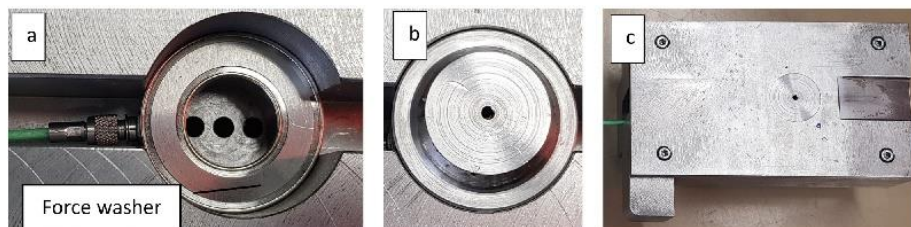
Quantitative measurement assembly (a) Force washer (b) Protection Plate (c) Fully assembled quantitative breech measurement plate.
